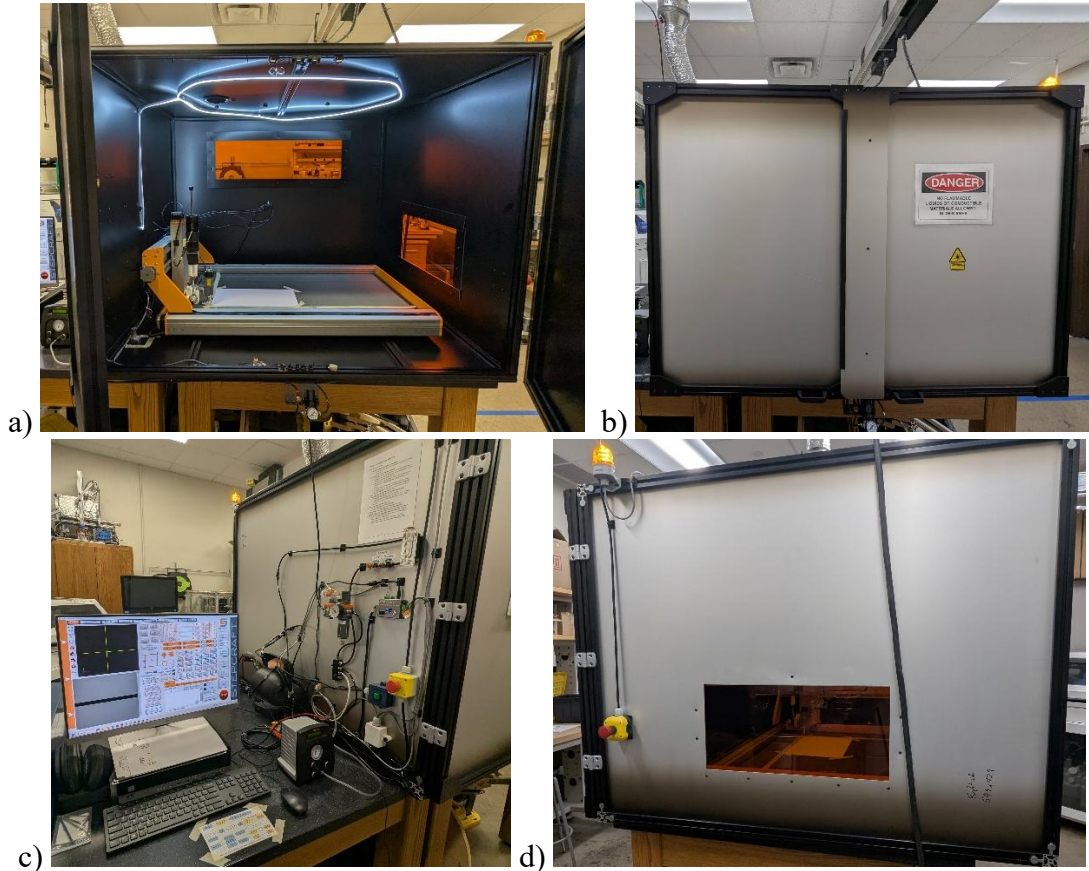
View of system safety features and controls: a) front of light-tight enclosure with doors open, b) front of light-tight enclosure with doors closed, c) left side view of enclosure, including controls d) right side view of enclosure, including window, e-stop, and safety warning light
